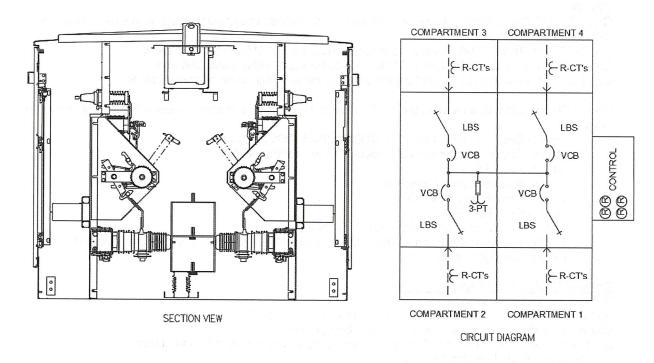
Preliminary Layout - Section View (Subject to Final Engineering)
